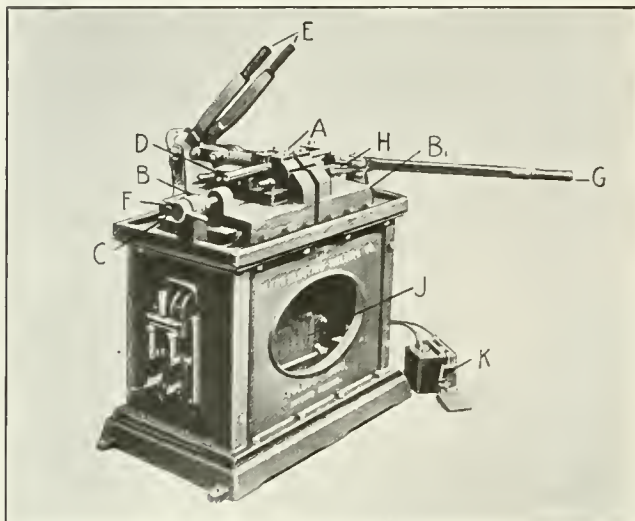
Simple Form of Machine for Welding Straight Rods or Tubes
